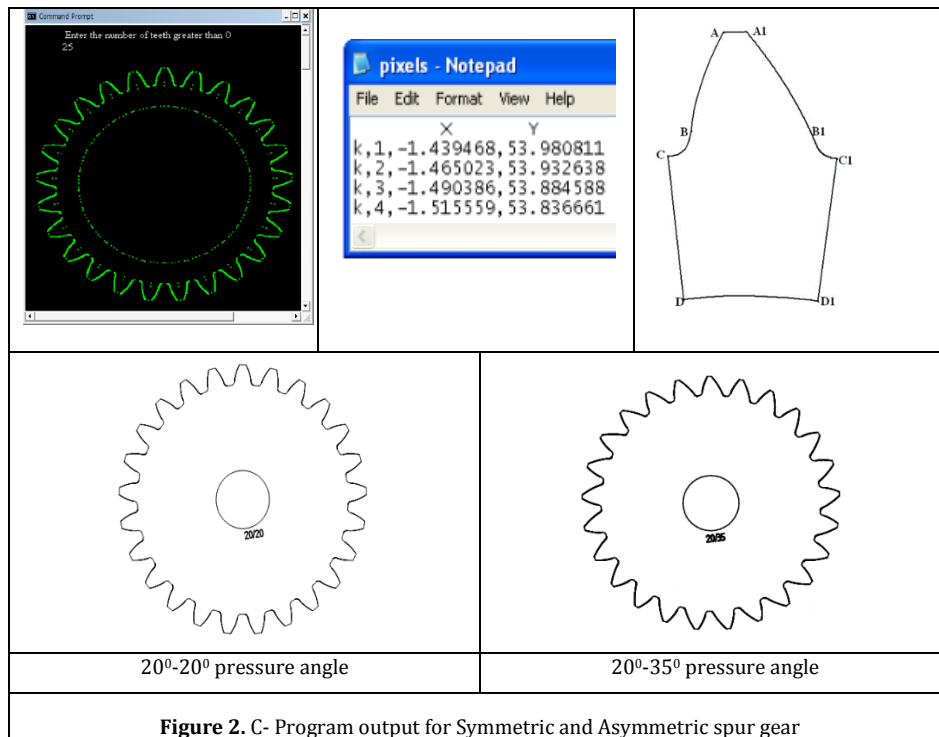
shows the graphical output, coordinate points for fillet and involute profile, full gear model with symmetric and Asymmetric spur gear tooth having 25 teeth. The output of the C- program was converted into 2-Dimensional gear tooth geometry using */ Prep7 initializing command in the ANSYS 18.2 to determine bending stress at the critical section.
